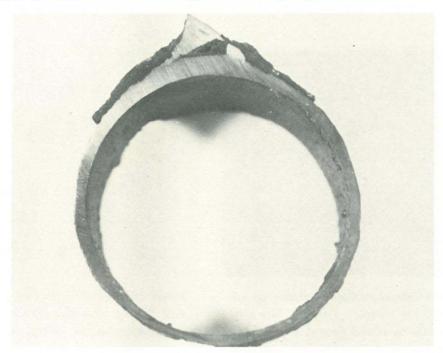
Cross-sectional View of an As-received T-22 Reheater Tube. Note the Extensive Metal Wastage in the Lower Portion of the Photograph.
